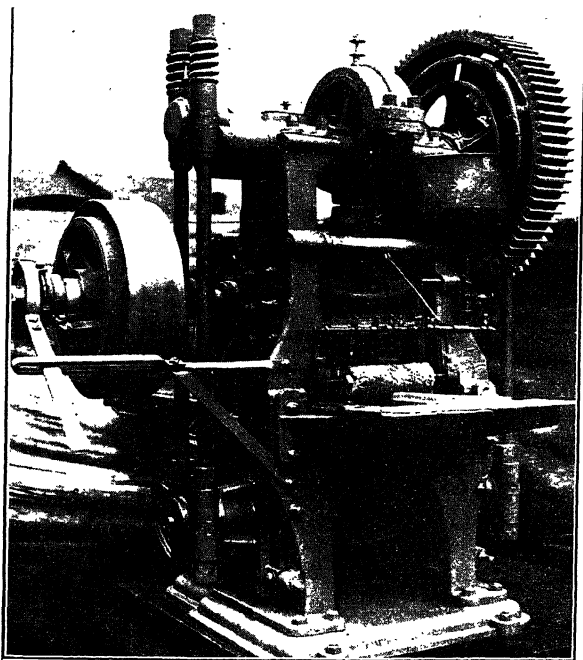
A machine re-press. (Courtesy of The Bonnot Company.)
